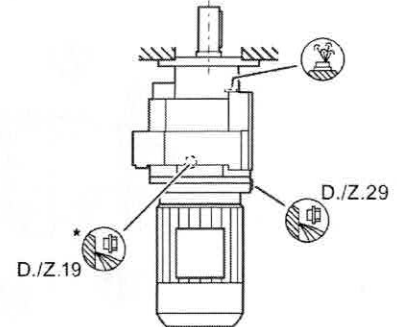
Mounting positions for helical gearbox DB/ZB foot / flange-mounted design, sizes 39 - 89
